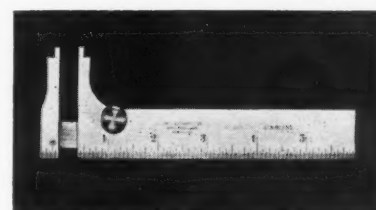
Pocket slide caliper brought out by the L. S. Starrett Co.
